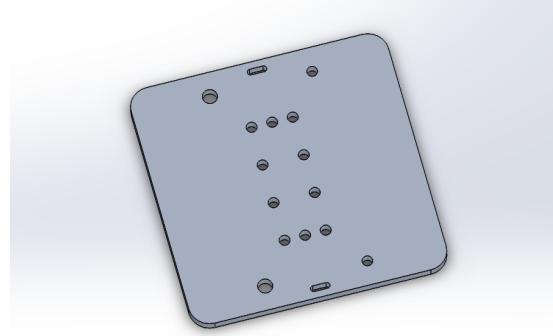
CAD Model of the Custom V-slot Gantry Plate with M5 holes for C-beam mount
